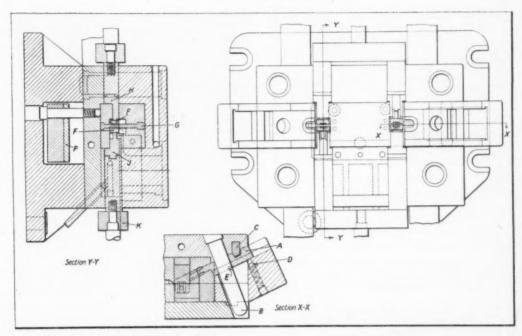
Details of the Die for Producing Brake Magnet Assemblies
